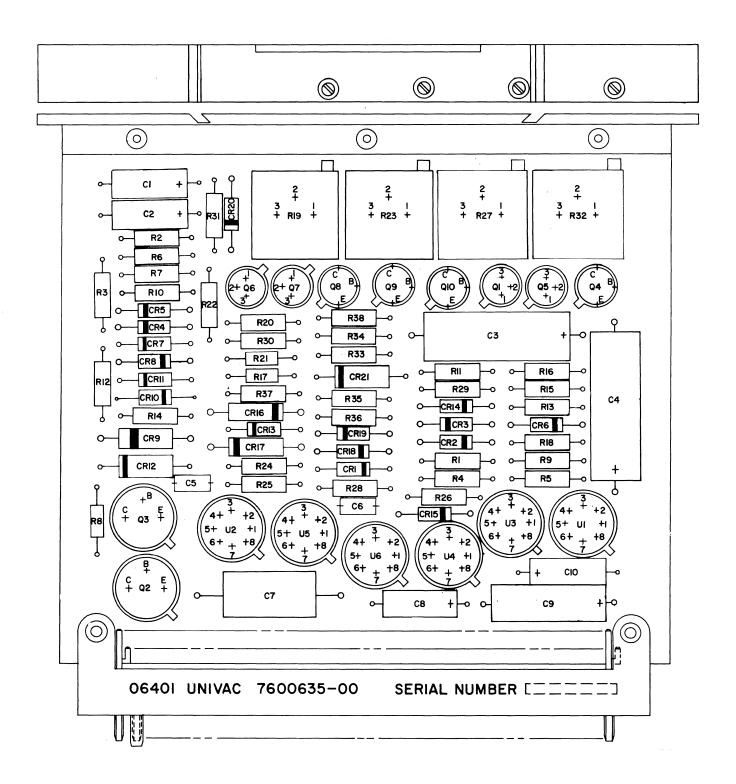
Capstan Servo Input Circuit Card Assembly (7600635)
